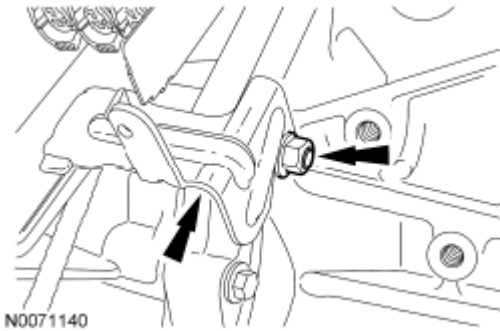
Locating HO2S And CMS Wire Connector Bracket And Nut
